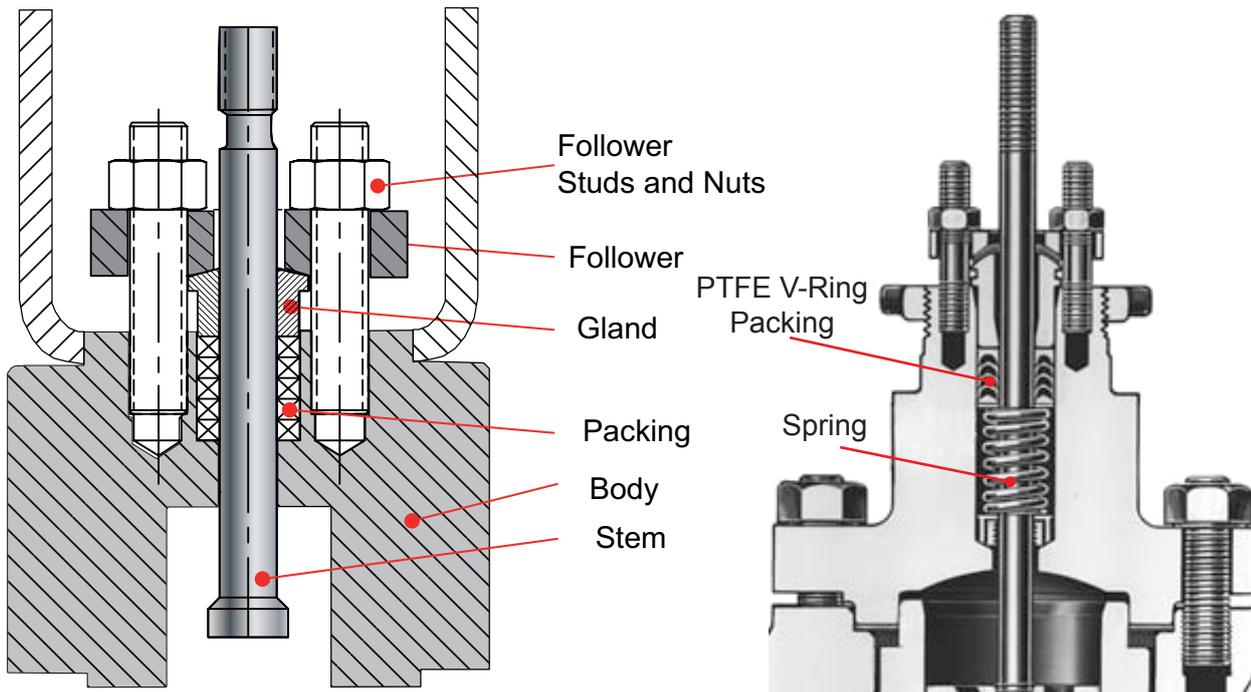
1: Design with packing flange (gland flange) and external bolting
